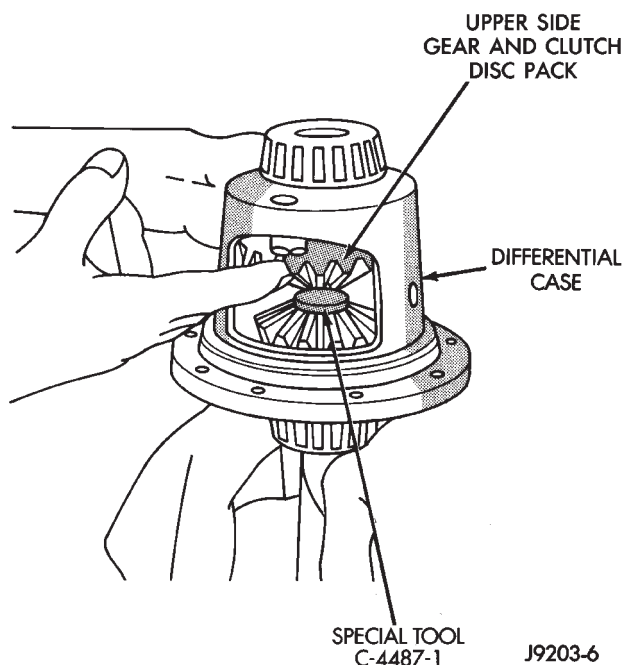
Upper Side Gear & Clutch Disc Pack Installation
